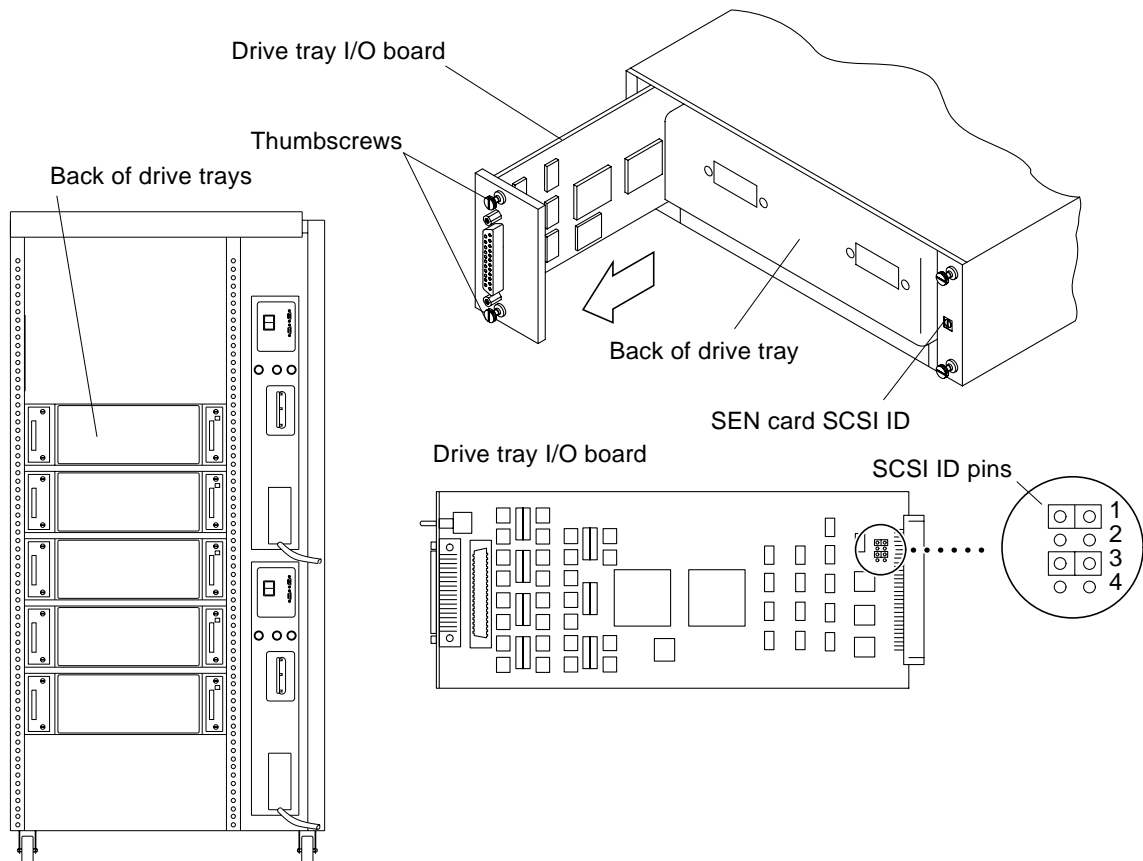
Removing the Drive Tray I/O Board and Setting SCSI ID Jumpers
